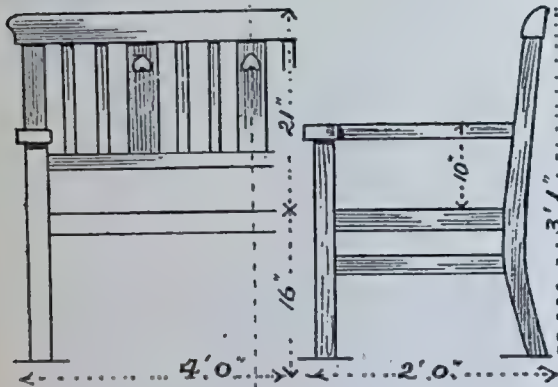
HALF FRONT ELEVATION AND END ELEVATION OF GARDEN SEAT.
